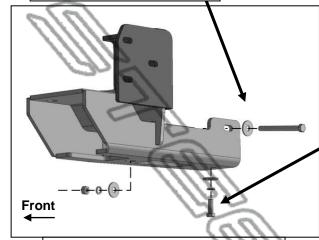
A) Attach Driver/left Support Bracket to side and threaded hole in bottom of frame extension
